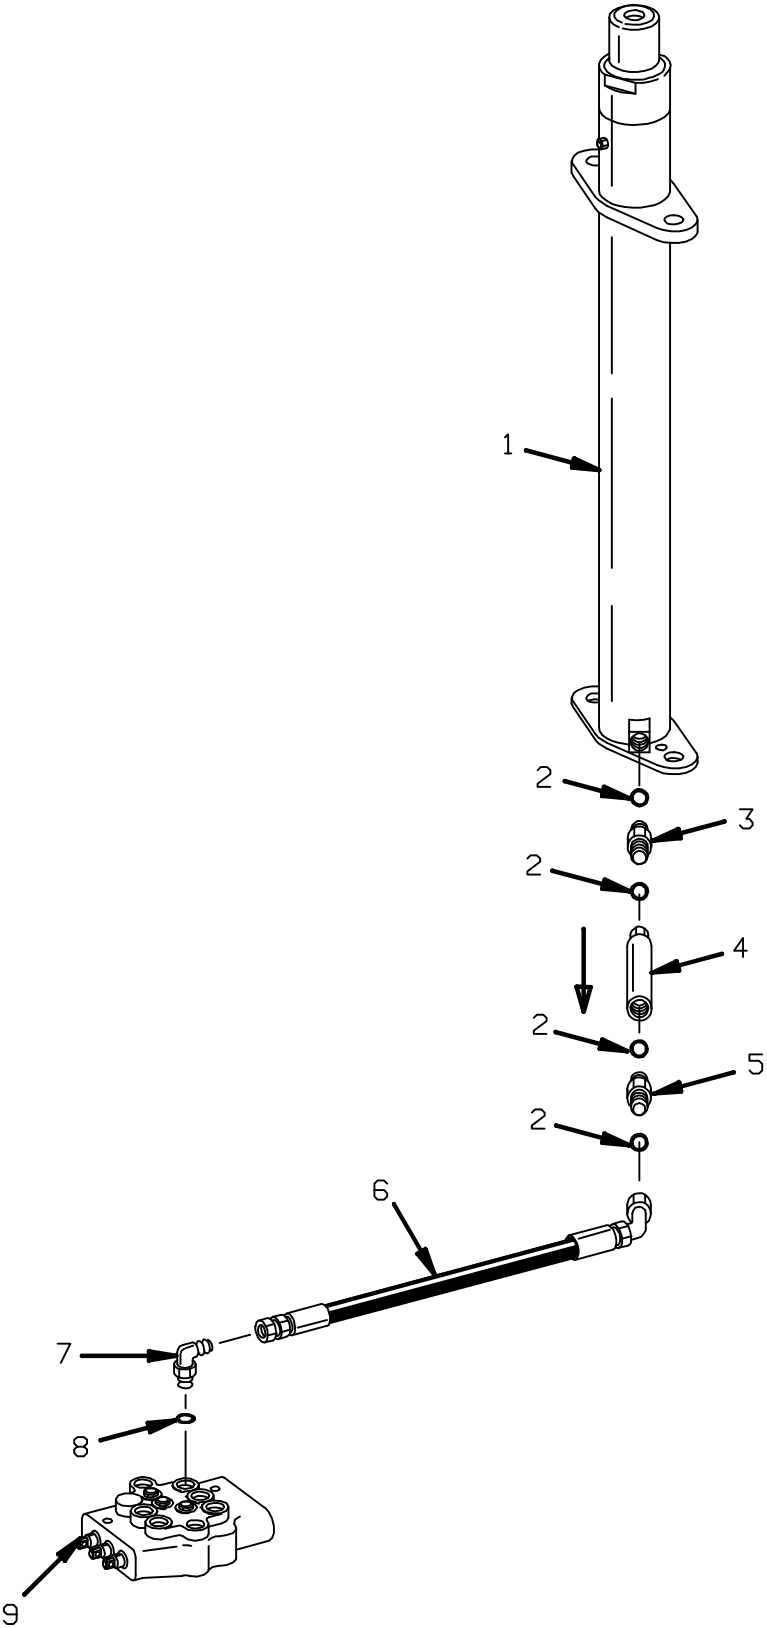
SC-30 TWO STAGE FULL FREELIFT SIDESHIFTER HYDRAULIC ASSEMBLY
